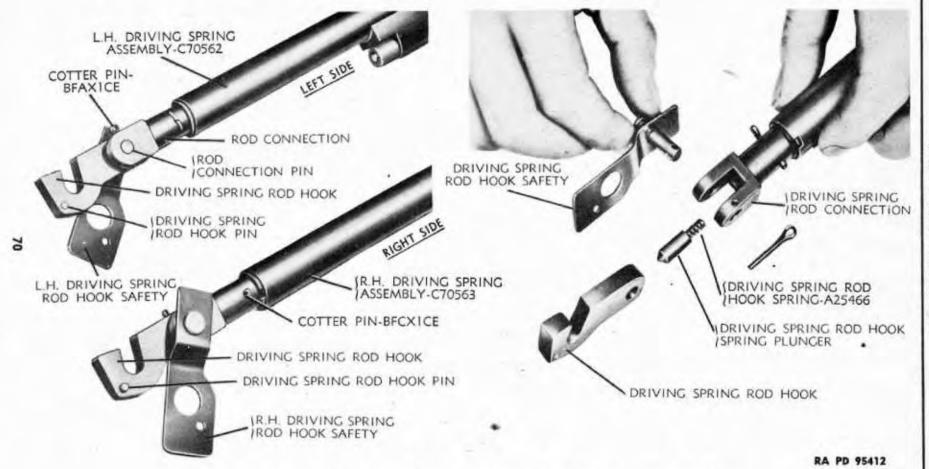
Assembly of Driving Spring Rod Hooks and Safeties
